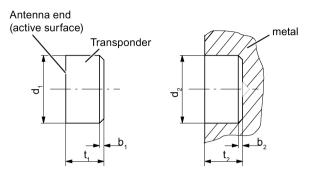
Flush-mounting of MDS D421 in metal with tools
